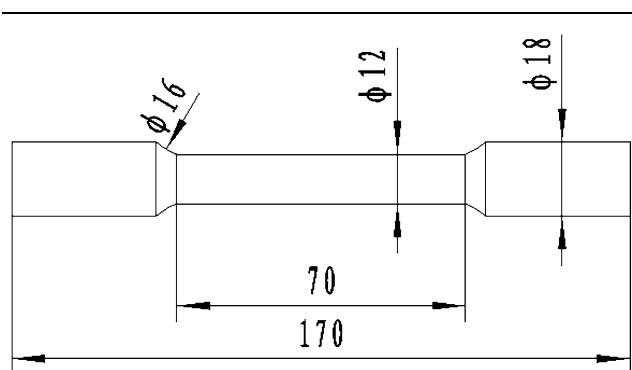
Tensile specimen geometry and dimensions (unit: mm).
